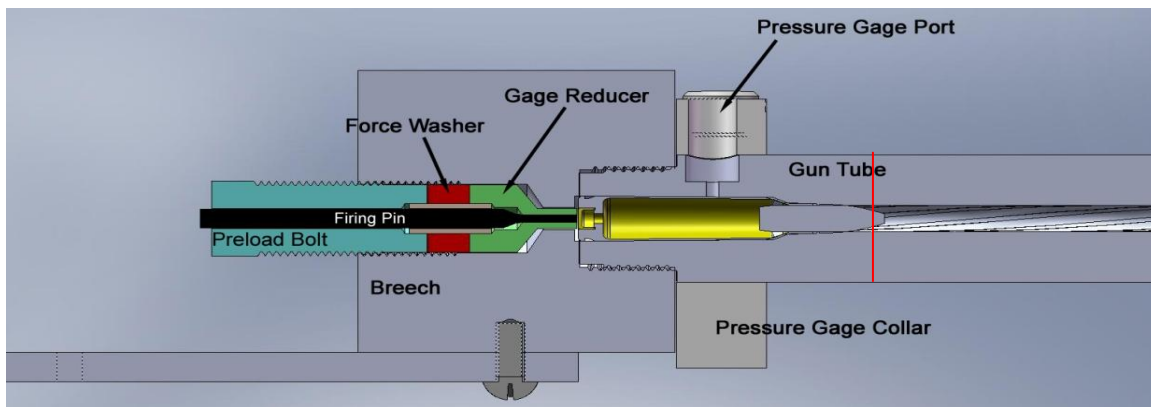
Detail view of 5.56-mm instrumented barrel and breech.
